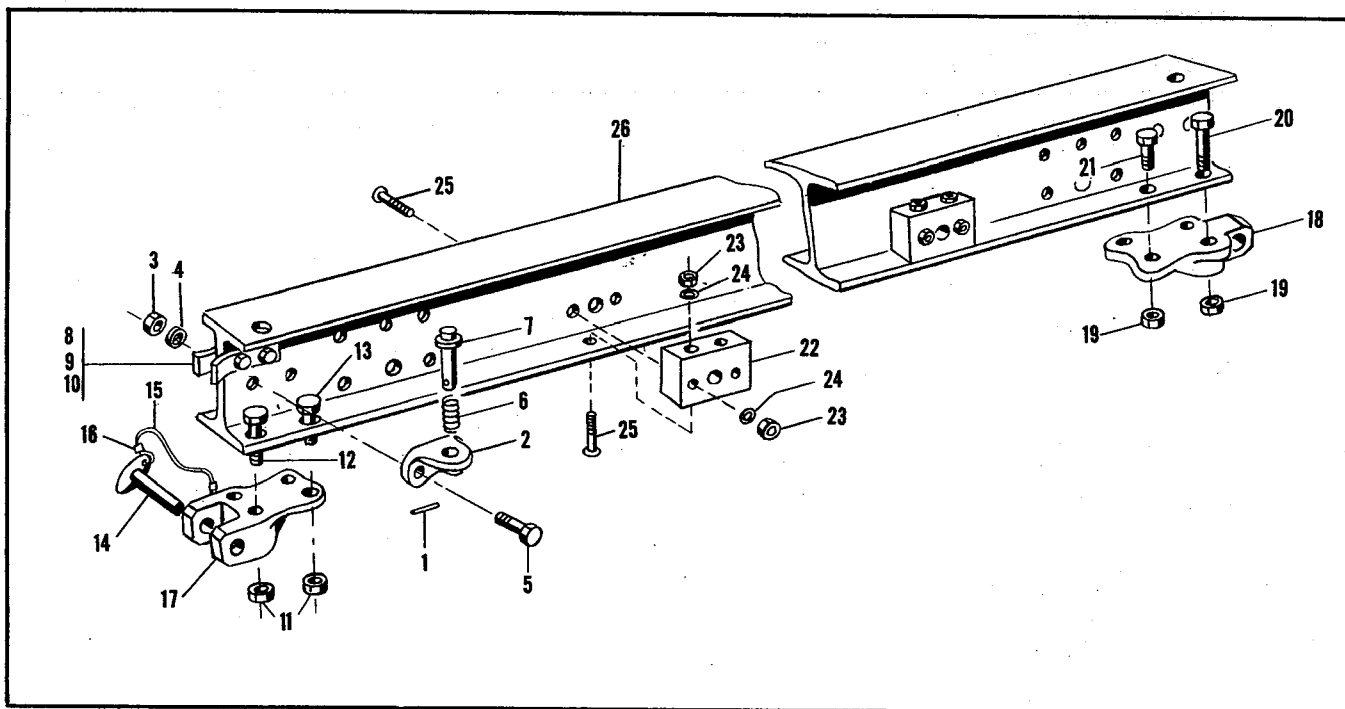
Engine Repair Stand Rail Assembly, Part No. 102914
